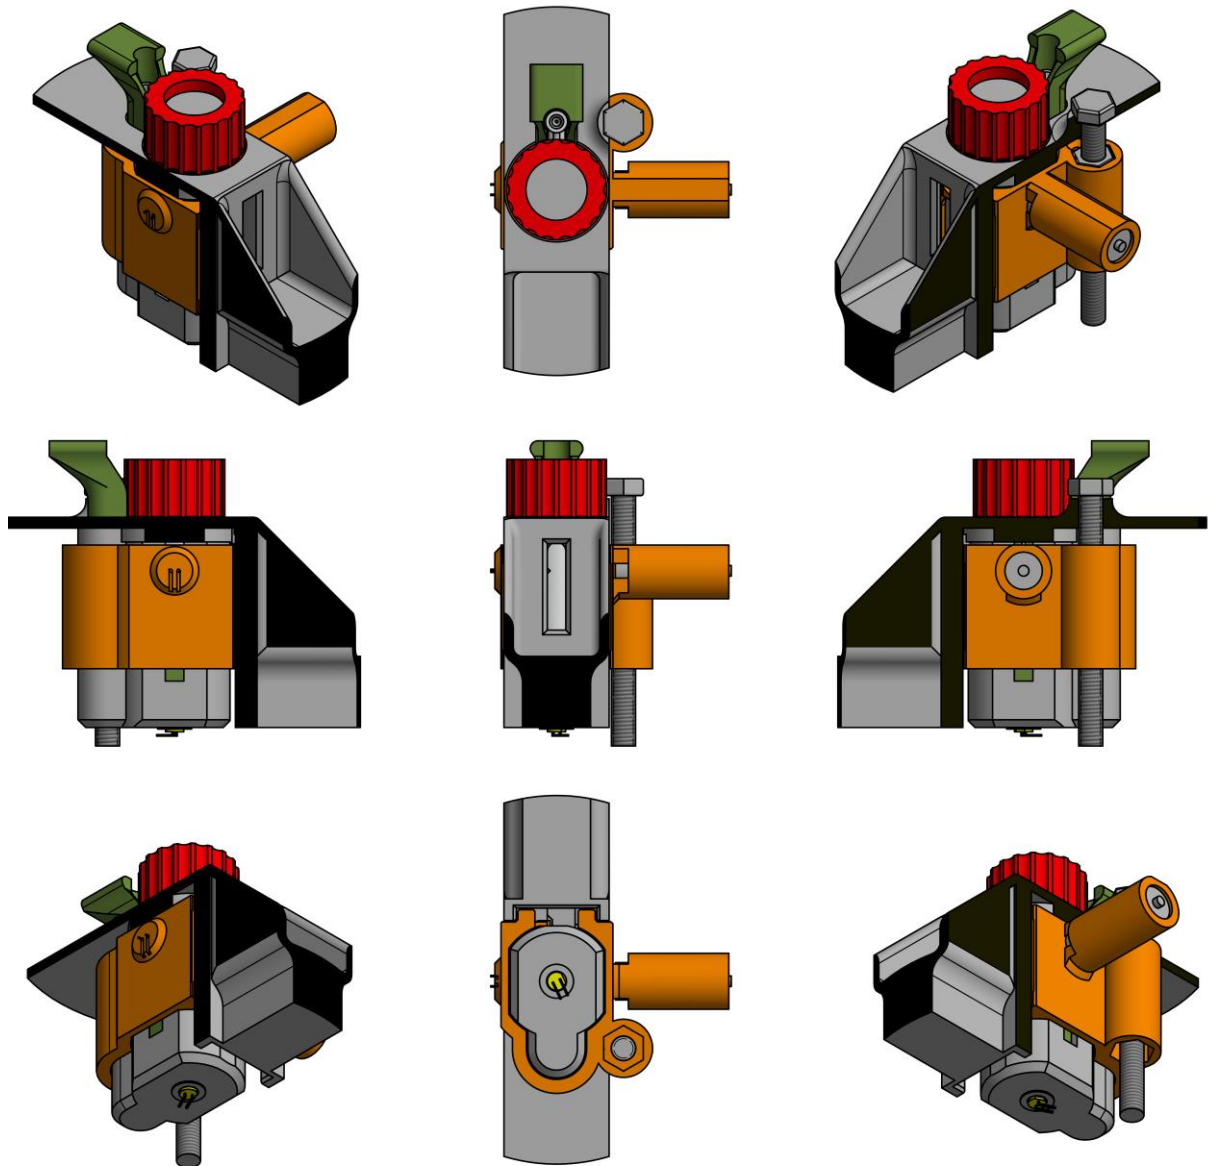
CAD views from the detection cell assembly in a cut-out section of the cover. The black regions represent cuts made for proper viewing of the assembly.
